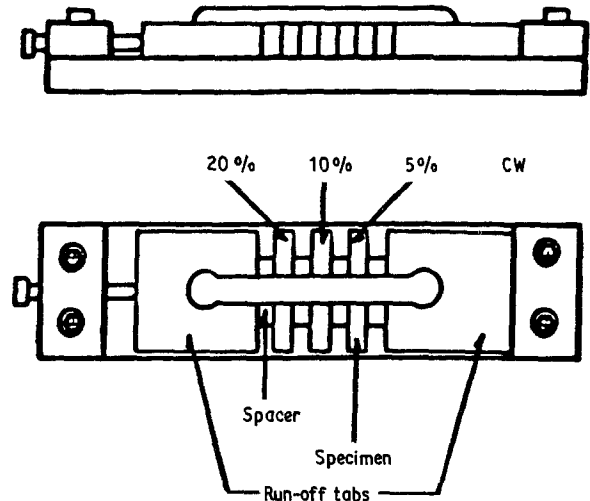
Welding fixture for holding the specimens during the welding process.
